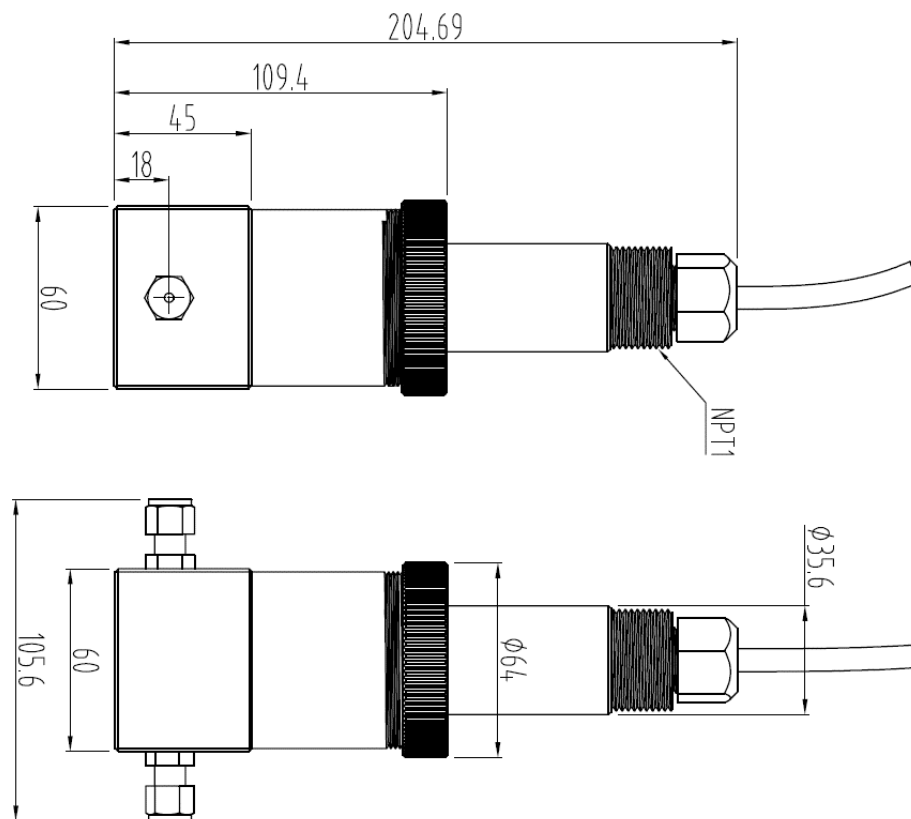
A – Dimension of the HW-201-T installed in ST-007 (mm)
